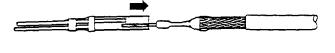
Low Temperature Coaxial Cable Solder Sleeve Installation
